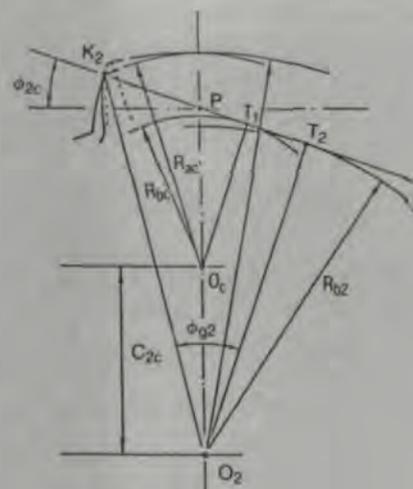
Internal Gear Cut by Shaper Cutter.
